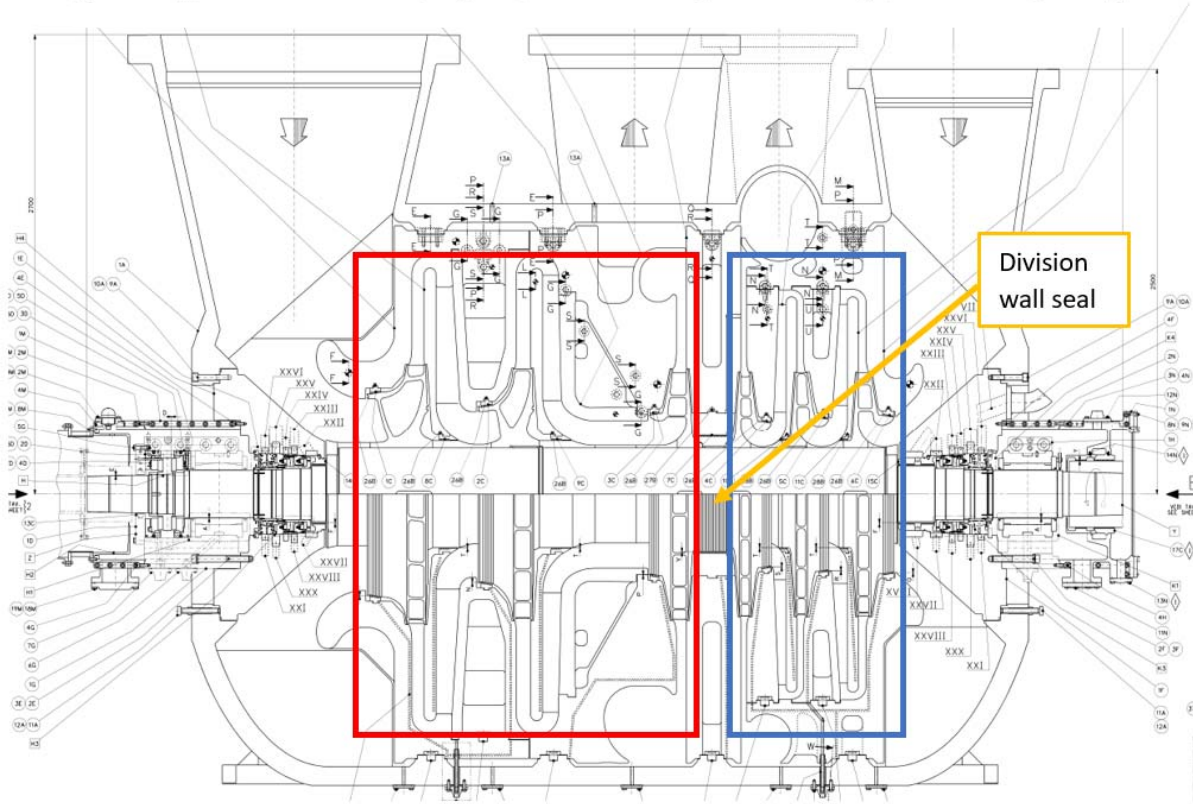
Cross-sectional drawing of compressor with LP (red) and HP (blue) outlined
